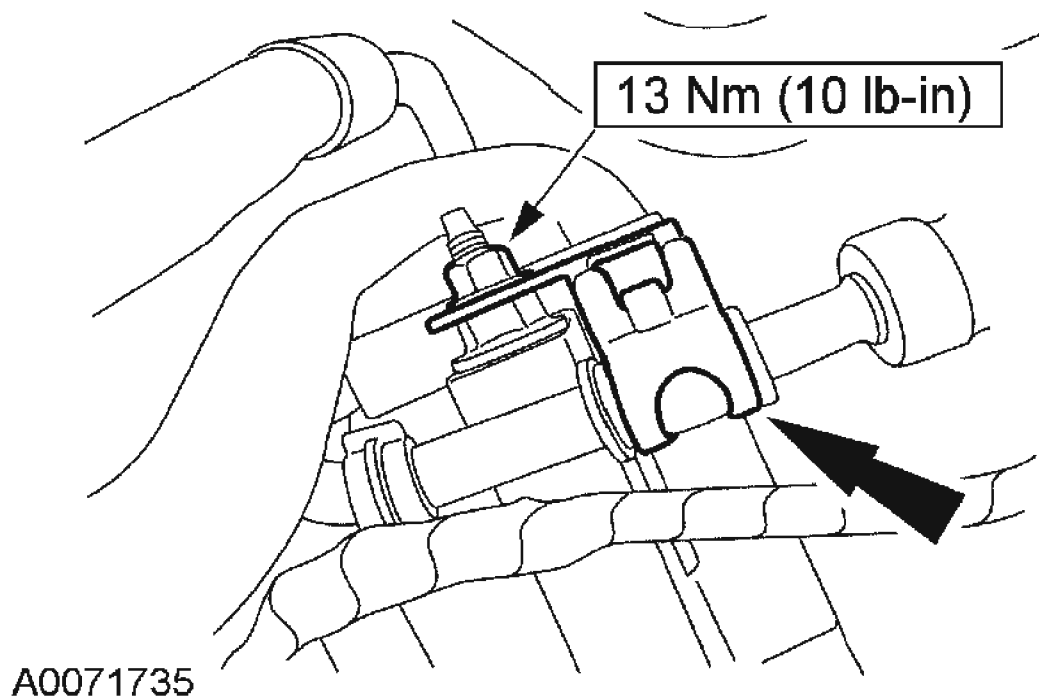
Attaching PSP Tube Bracket And Installing Nut
